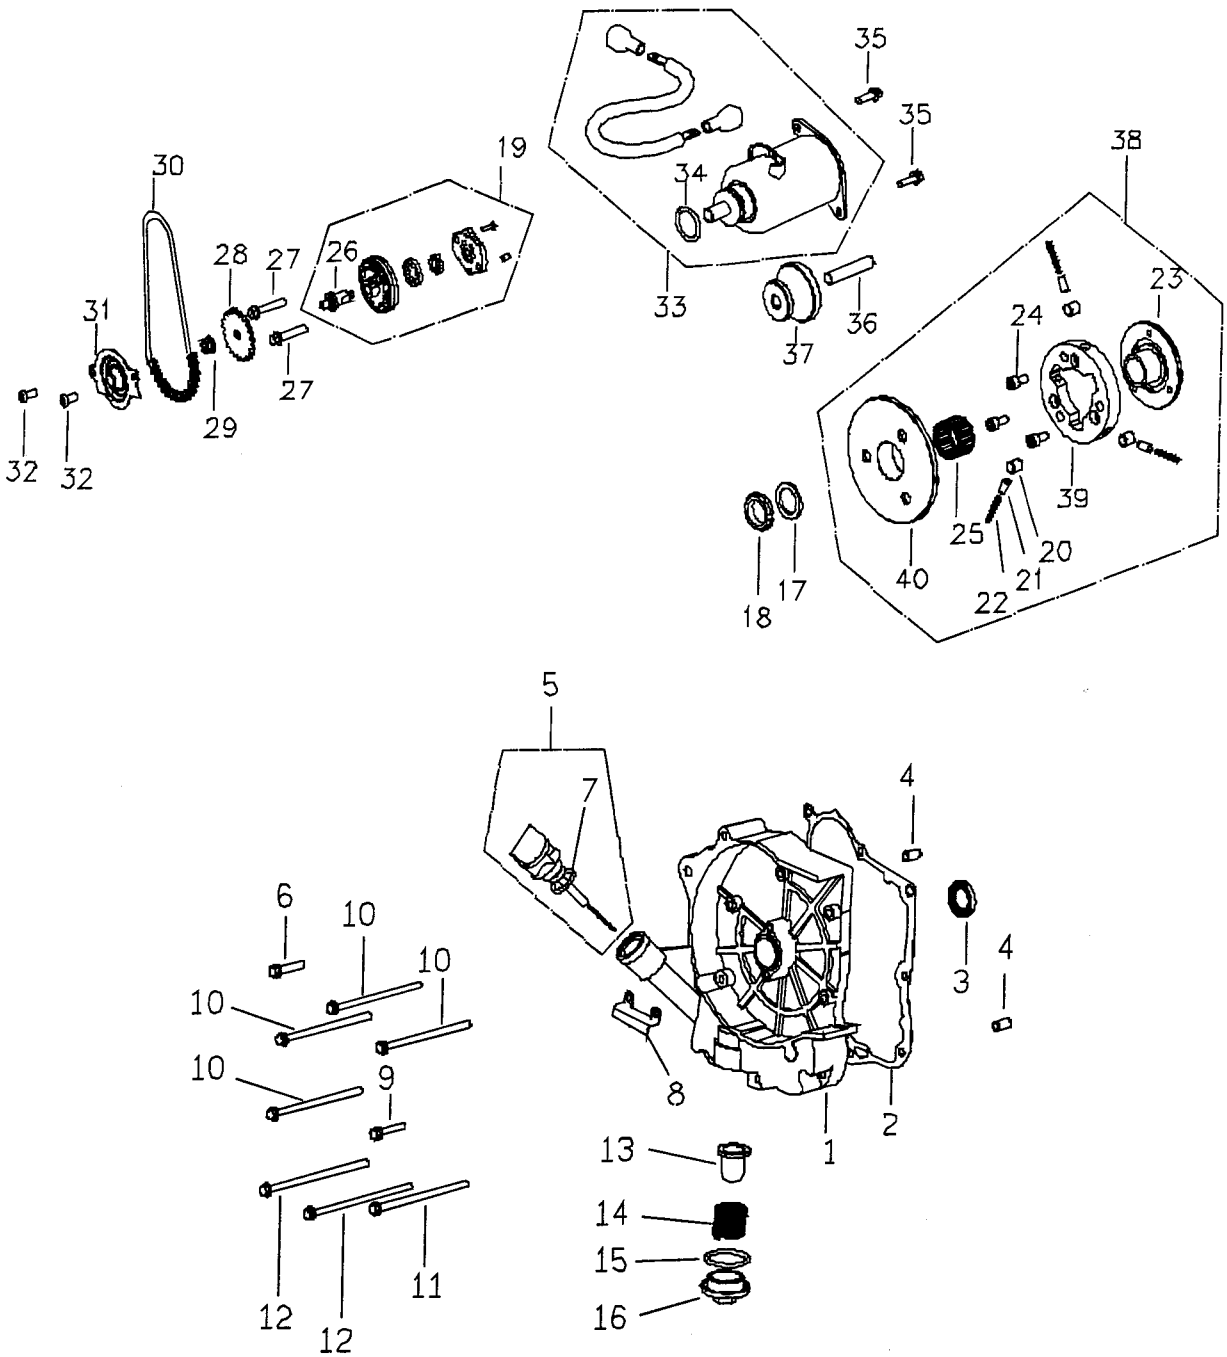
ENGINE RIGHT CRANKCASE COVER
